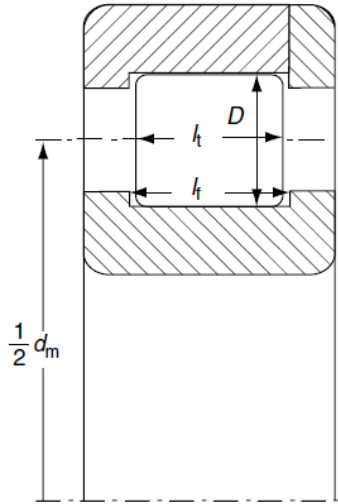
Cylindrical roller bearing schematic drawing [6]
